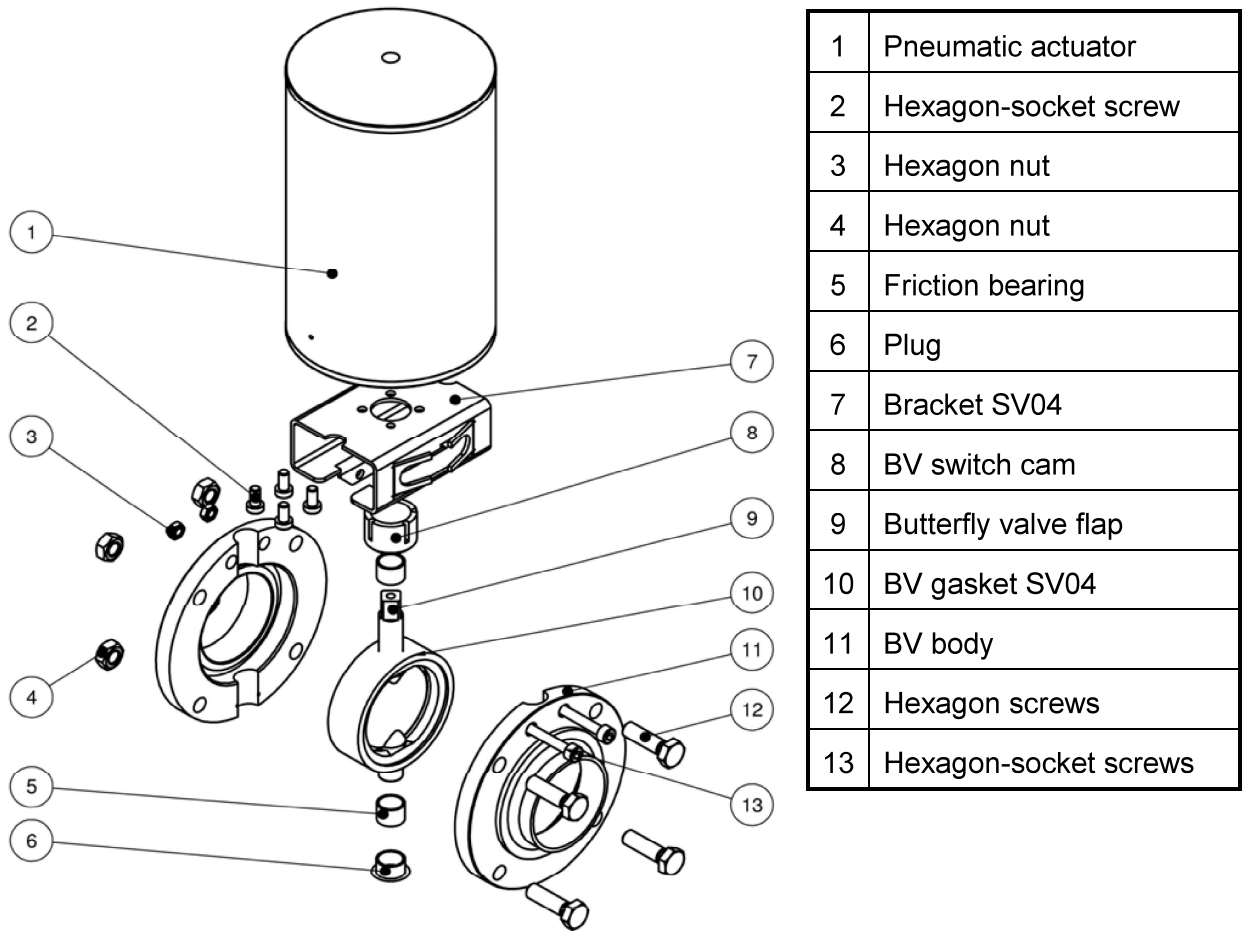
Disassembly butterfly valve type SV04 with pneumatic actuator PAMS
